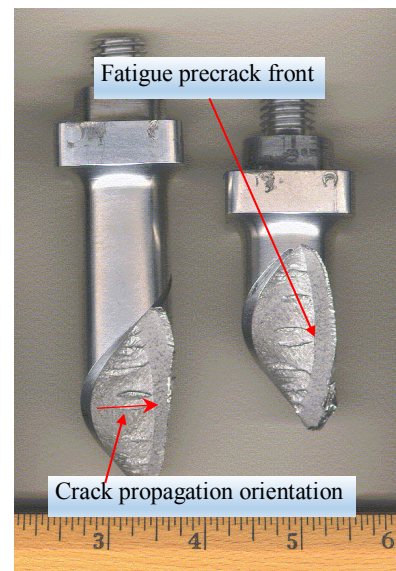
Fractured SNTT specimens: (a) A302B, and (b) A533B miniature sample.
